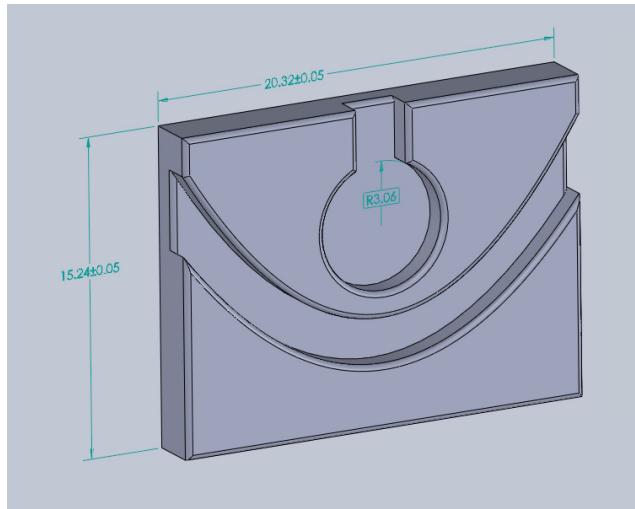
CAD drawing of the base design with dimensions in centimeters. For a more complete set of dimensions, see the drawing in Appendix C.
